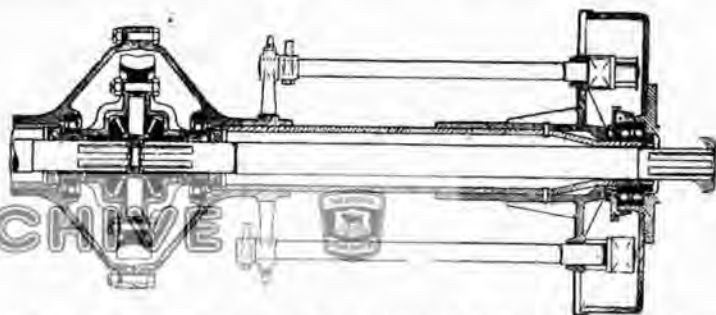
Section of the 1-ton vehicle's rear axle, showing worm drive and differential, brake drums and camshafts, and construction of the axle casing.
